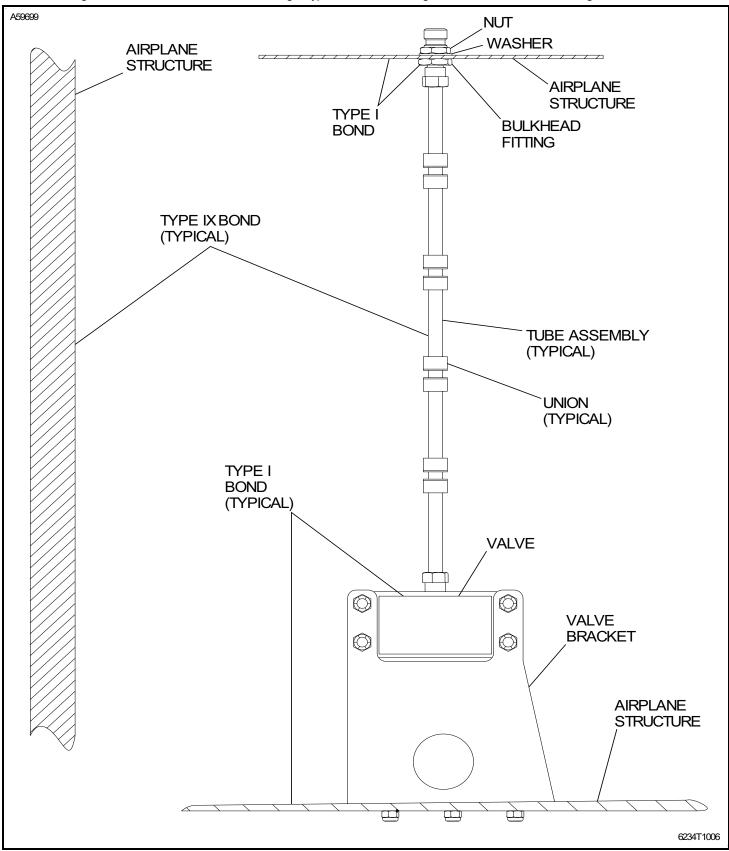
Sheet 1 : Electrical Bonding - Typical Metallic Tubing Route with a Bulkhead Fitting and a Valve
